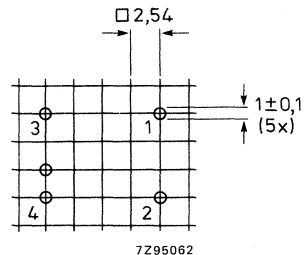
Hole pattern for mounting on a printed-wiring board (component side).
